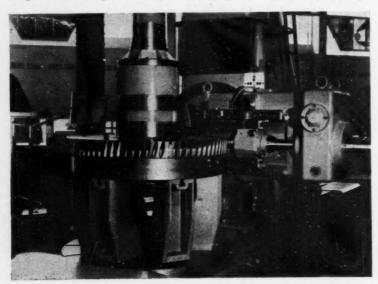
Modul Type ZFWZ 2000 x 2 Universal Gear Hobbing and Milling Machine
